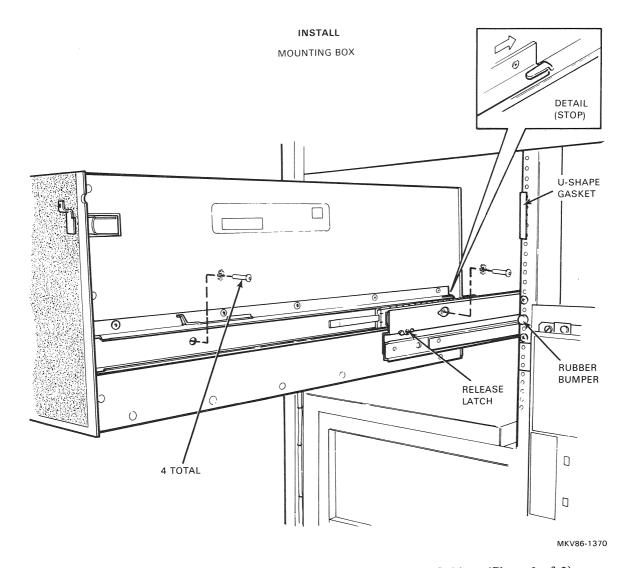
Mounting Box Installation Within an H9652 Cabinet (Sheet 3 of 3)
